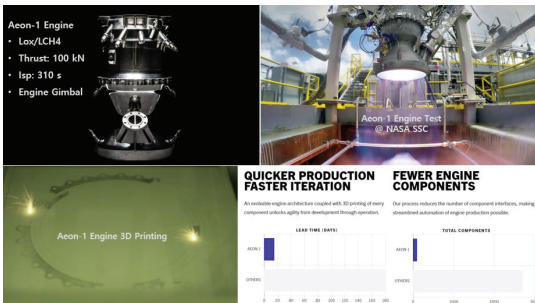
Aeon-1 thrust chamber appearance, its manufacturing by 3D printing, and combustion test[54,55].
